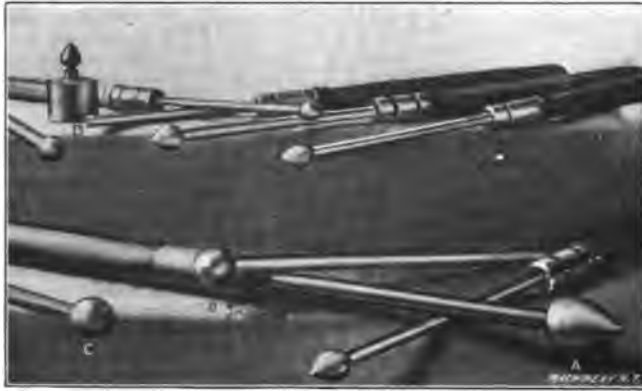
Metal Spinning Tools with High-speed Steel Removable Heads
